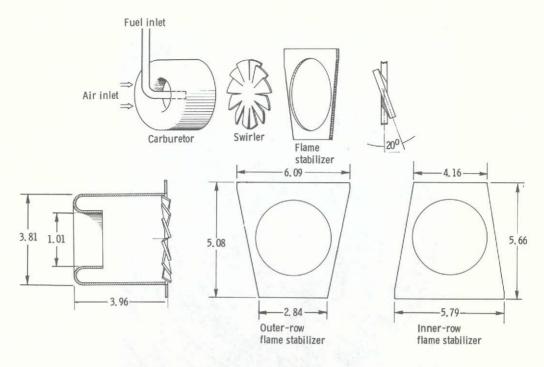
Combustor module details. (Dimensions are in centimeters.)
